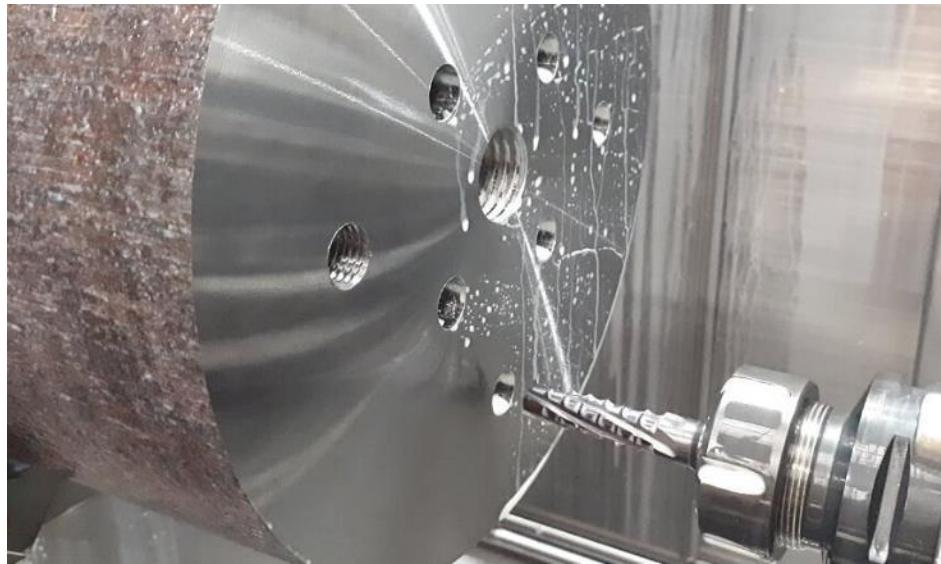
Workpiece and thread milling solid tool before machining of a thread.
